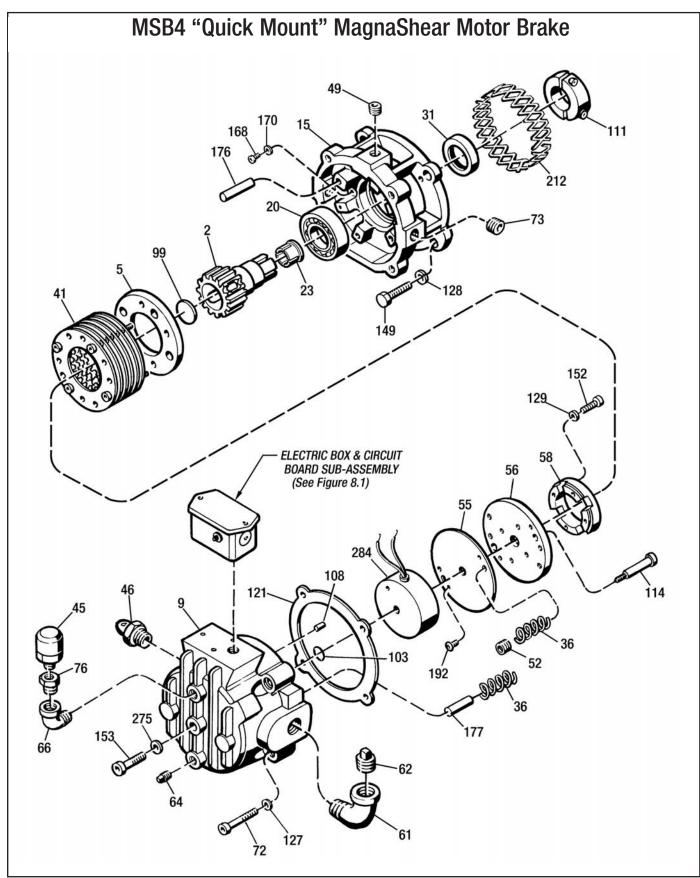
MSB4 "Quick Mount" MagnaShear Motor Brake
